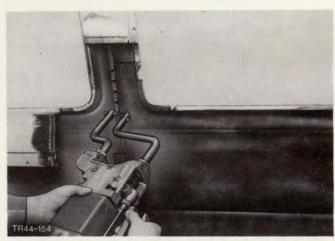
Spot weld front side panel to rear side panel (from inside).
